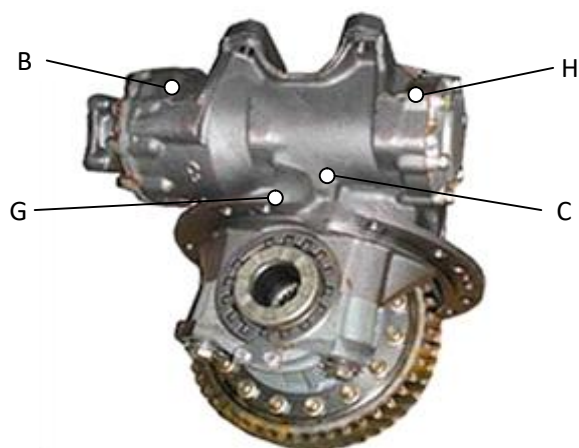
Rear axle gearbox with markers for B, C, G and H bearings
